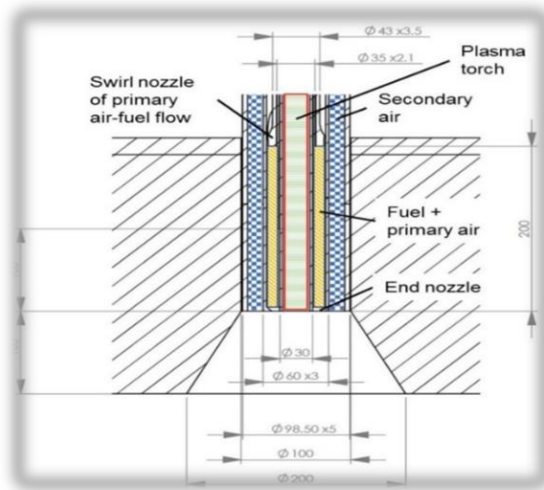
Cross-sectional layout of the burner outlet [54]
